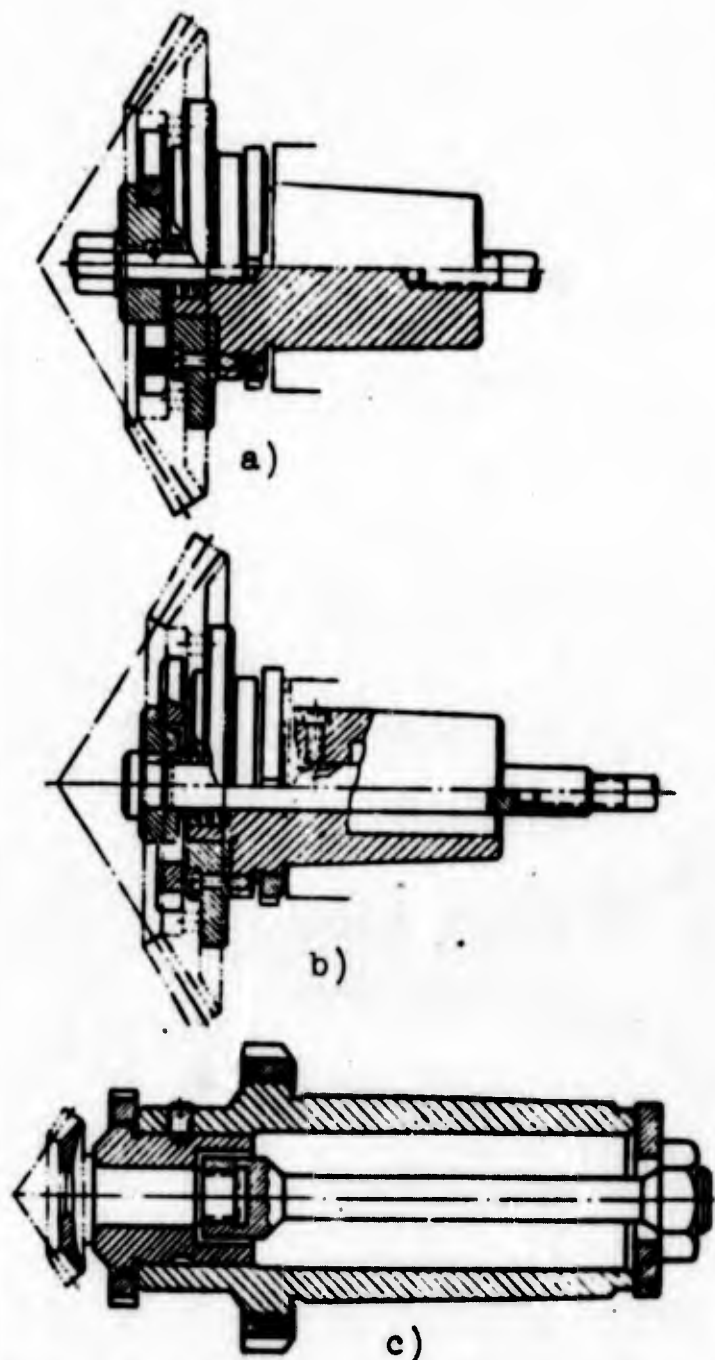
Examples of installation of bevel gears for cutting of teeth. a) fastening in front by nut; b) fastening by bar (through spindle); c) fastening behind shank.
